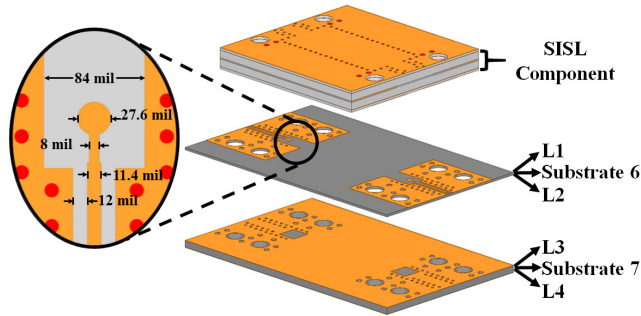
A 3-D view of carrier board with SMT SISL component.
